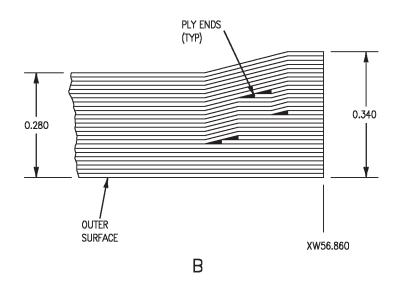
Inner Wing Upper Surface Solid Composite Laminate and Door Sill Inspection Areas (Sheet 2)
